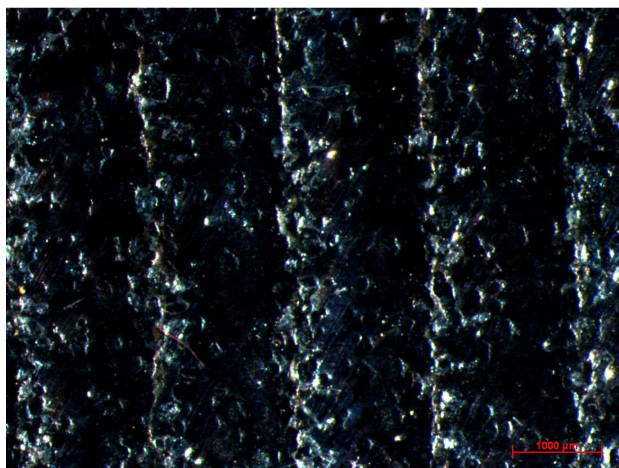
The view of overlay weld cross section for sample No 1
